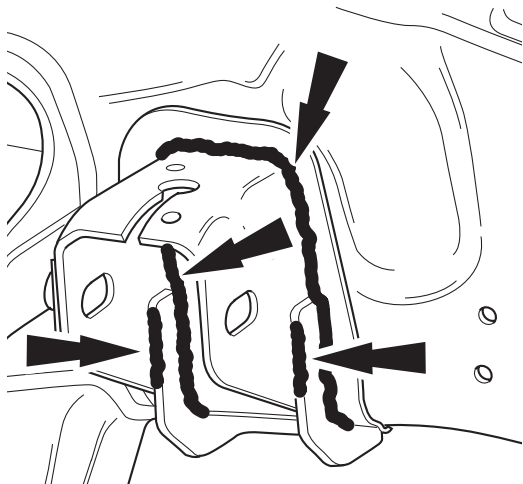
VIEW OF DIFFERENTIAL BRACKET AND REINFORCEMENT ASSEMBLED TO THE FRAME SHOWING THE WELD PATTERN REQUIRED
